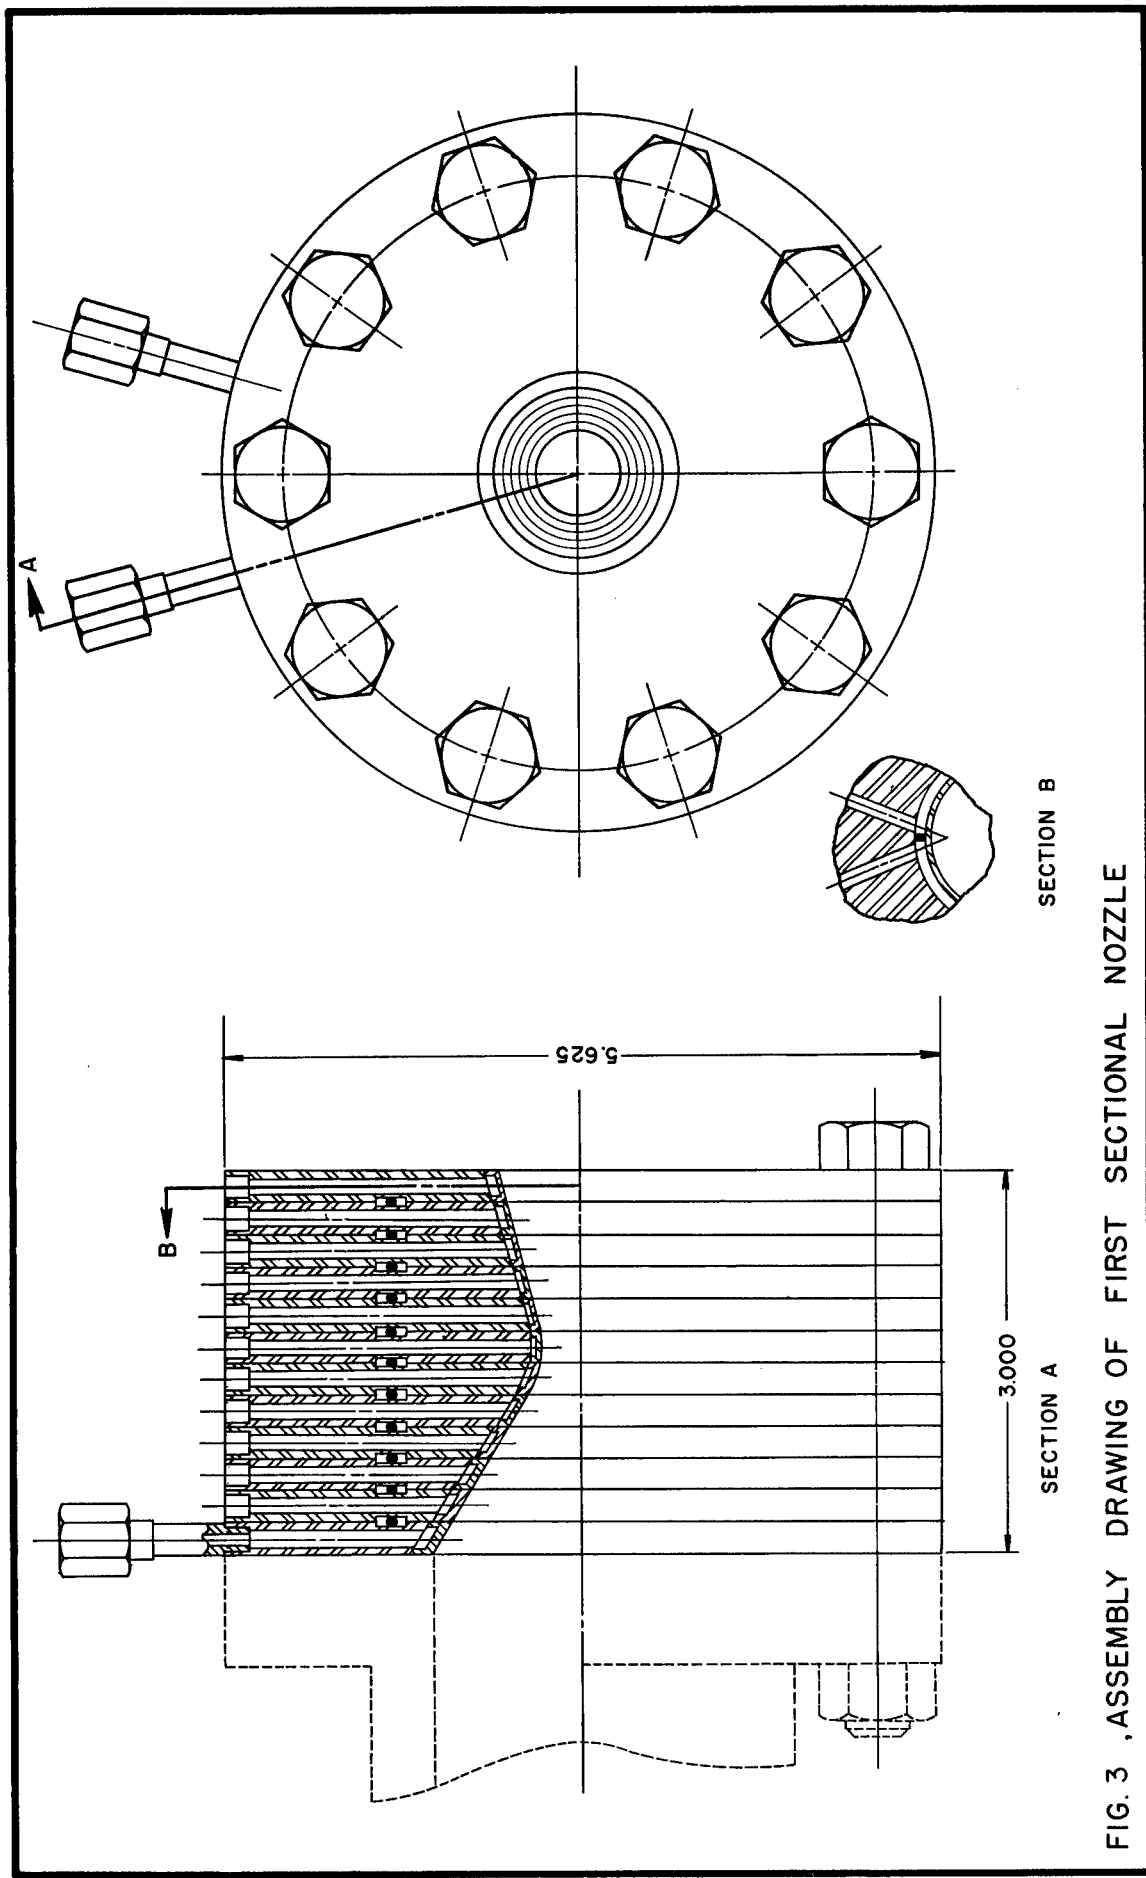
,ASSEMBLY DRAWING OF FIRST SECTIONAL NOZZLE
